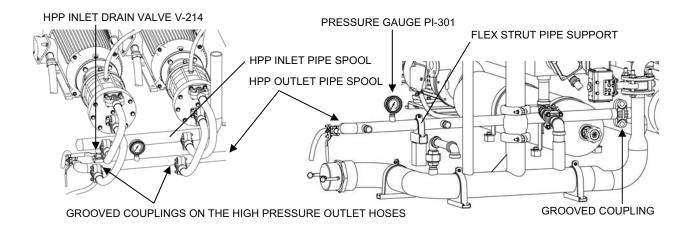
High Pressure Pump Outlet Pipe Spool Removal.
